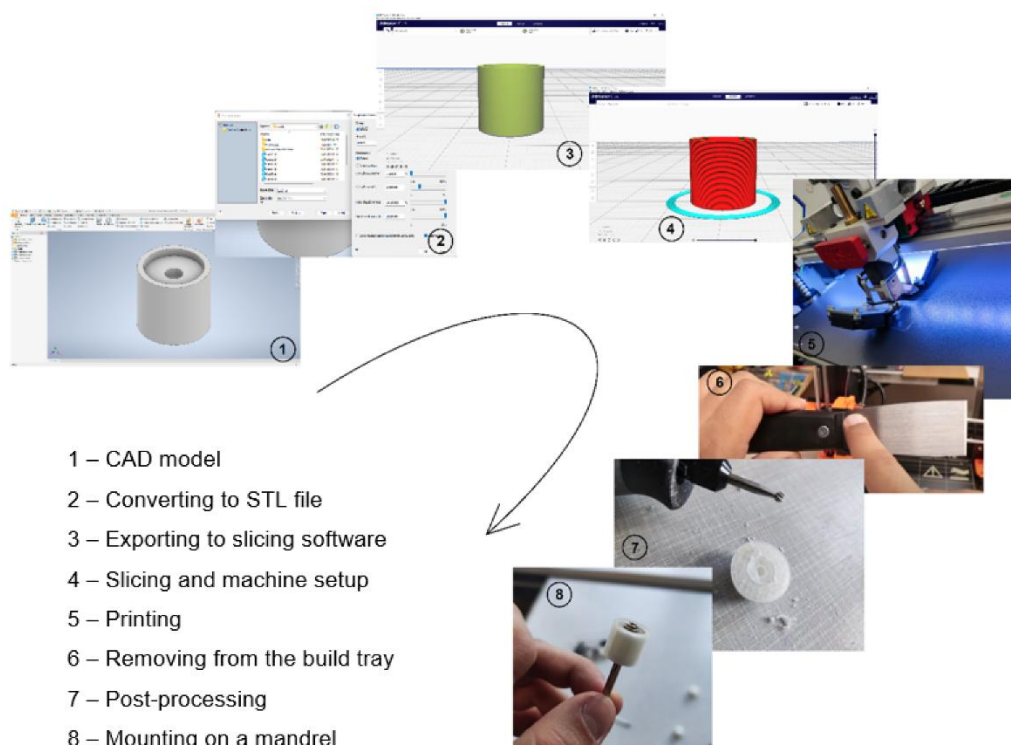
The fabrication process of abrasive tools using material extrusion-based additive manufacturing [8]
